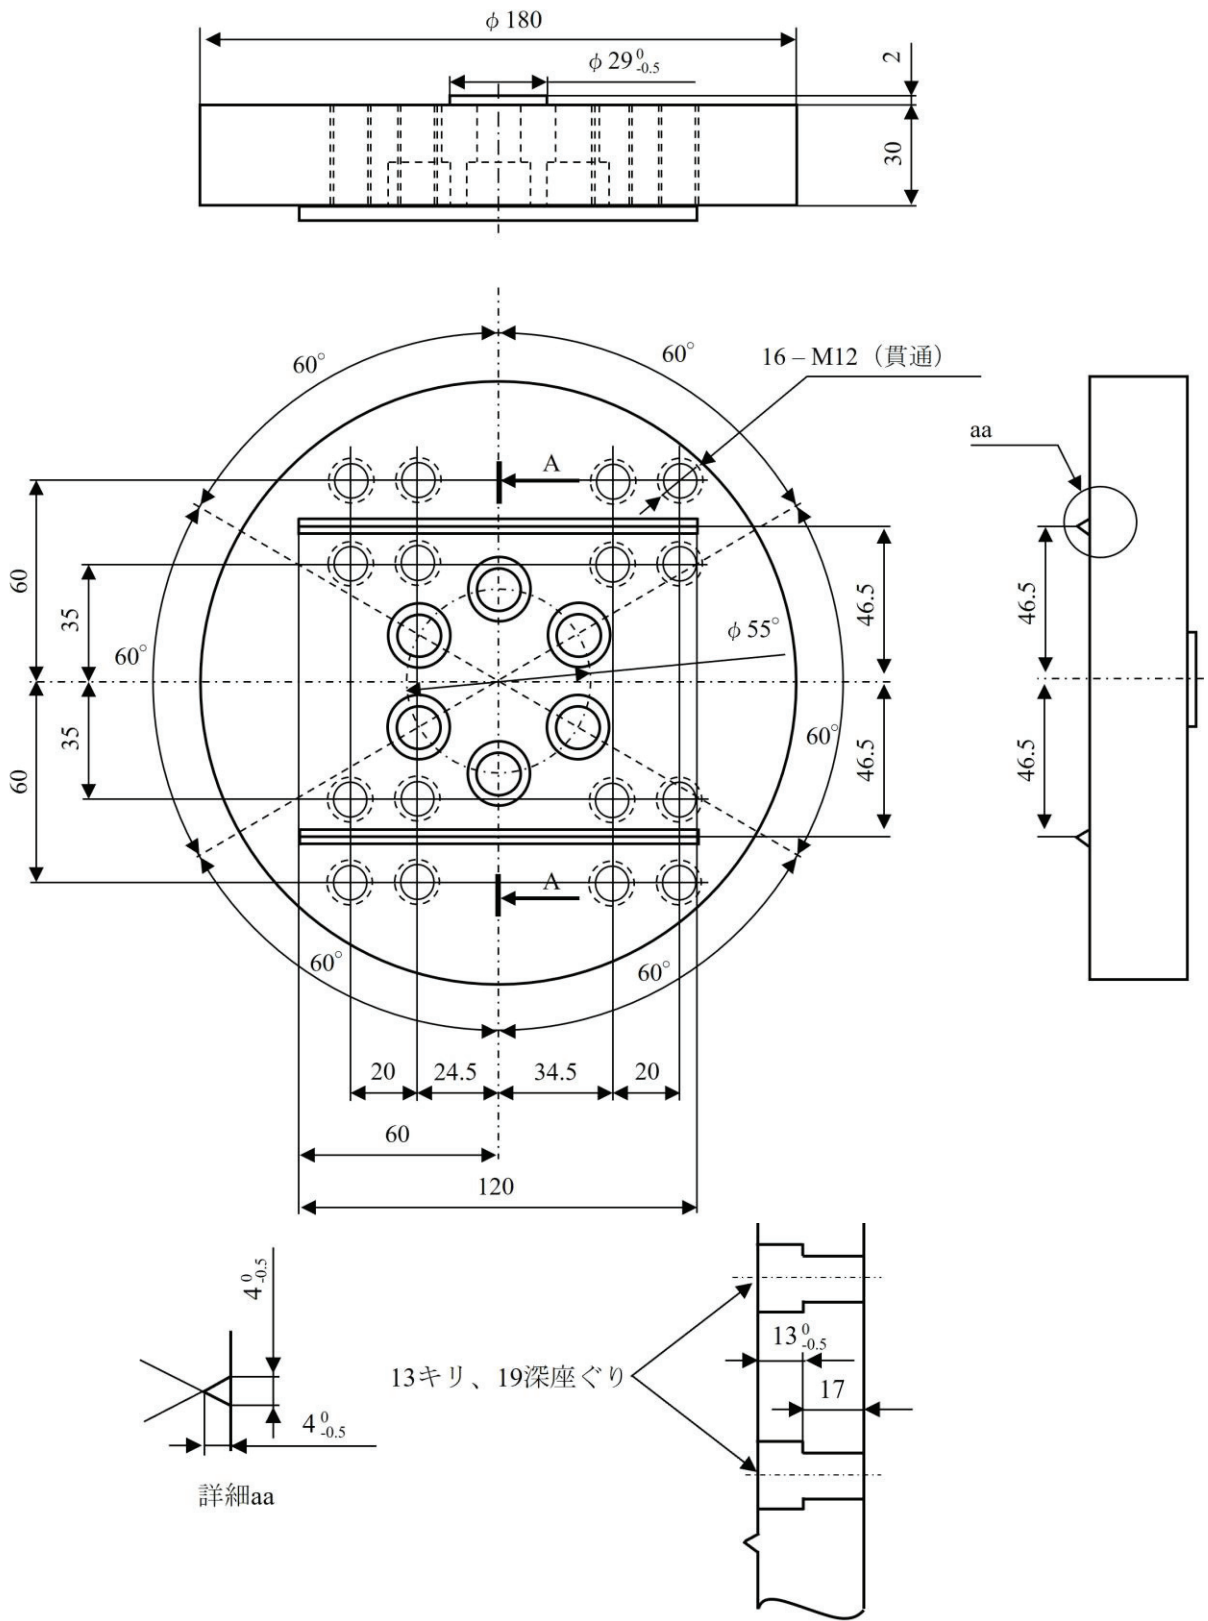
Jig1 for one-sided welding of the fillet joint (unit : mm)
